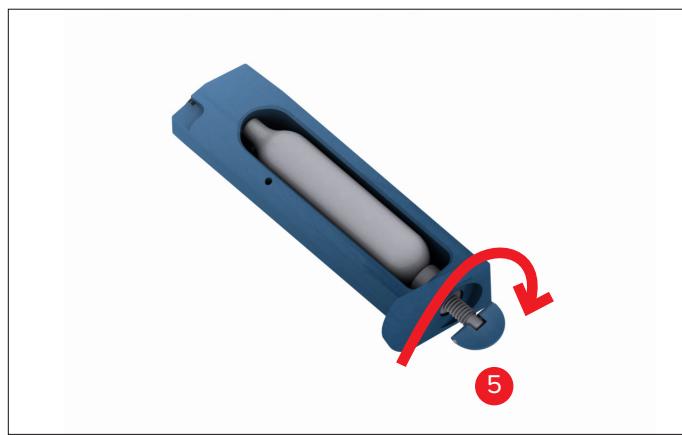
Tighten the wing nut to secure the CO2 cylinder
